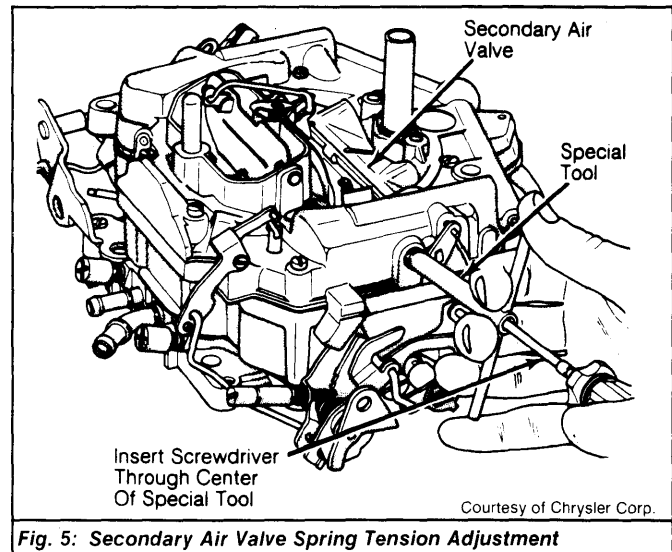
Secondary Air Valve Spring Tension Adjustment
